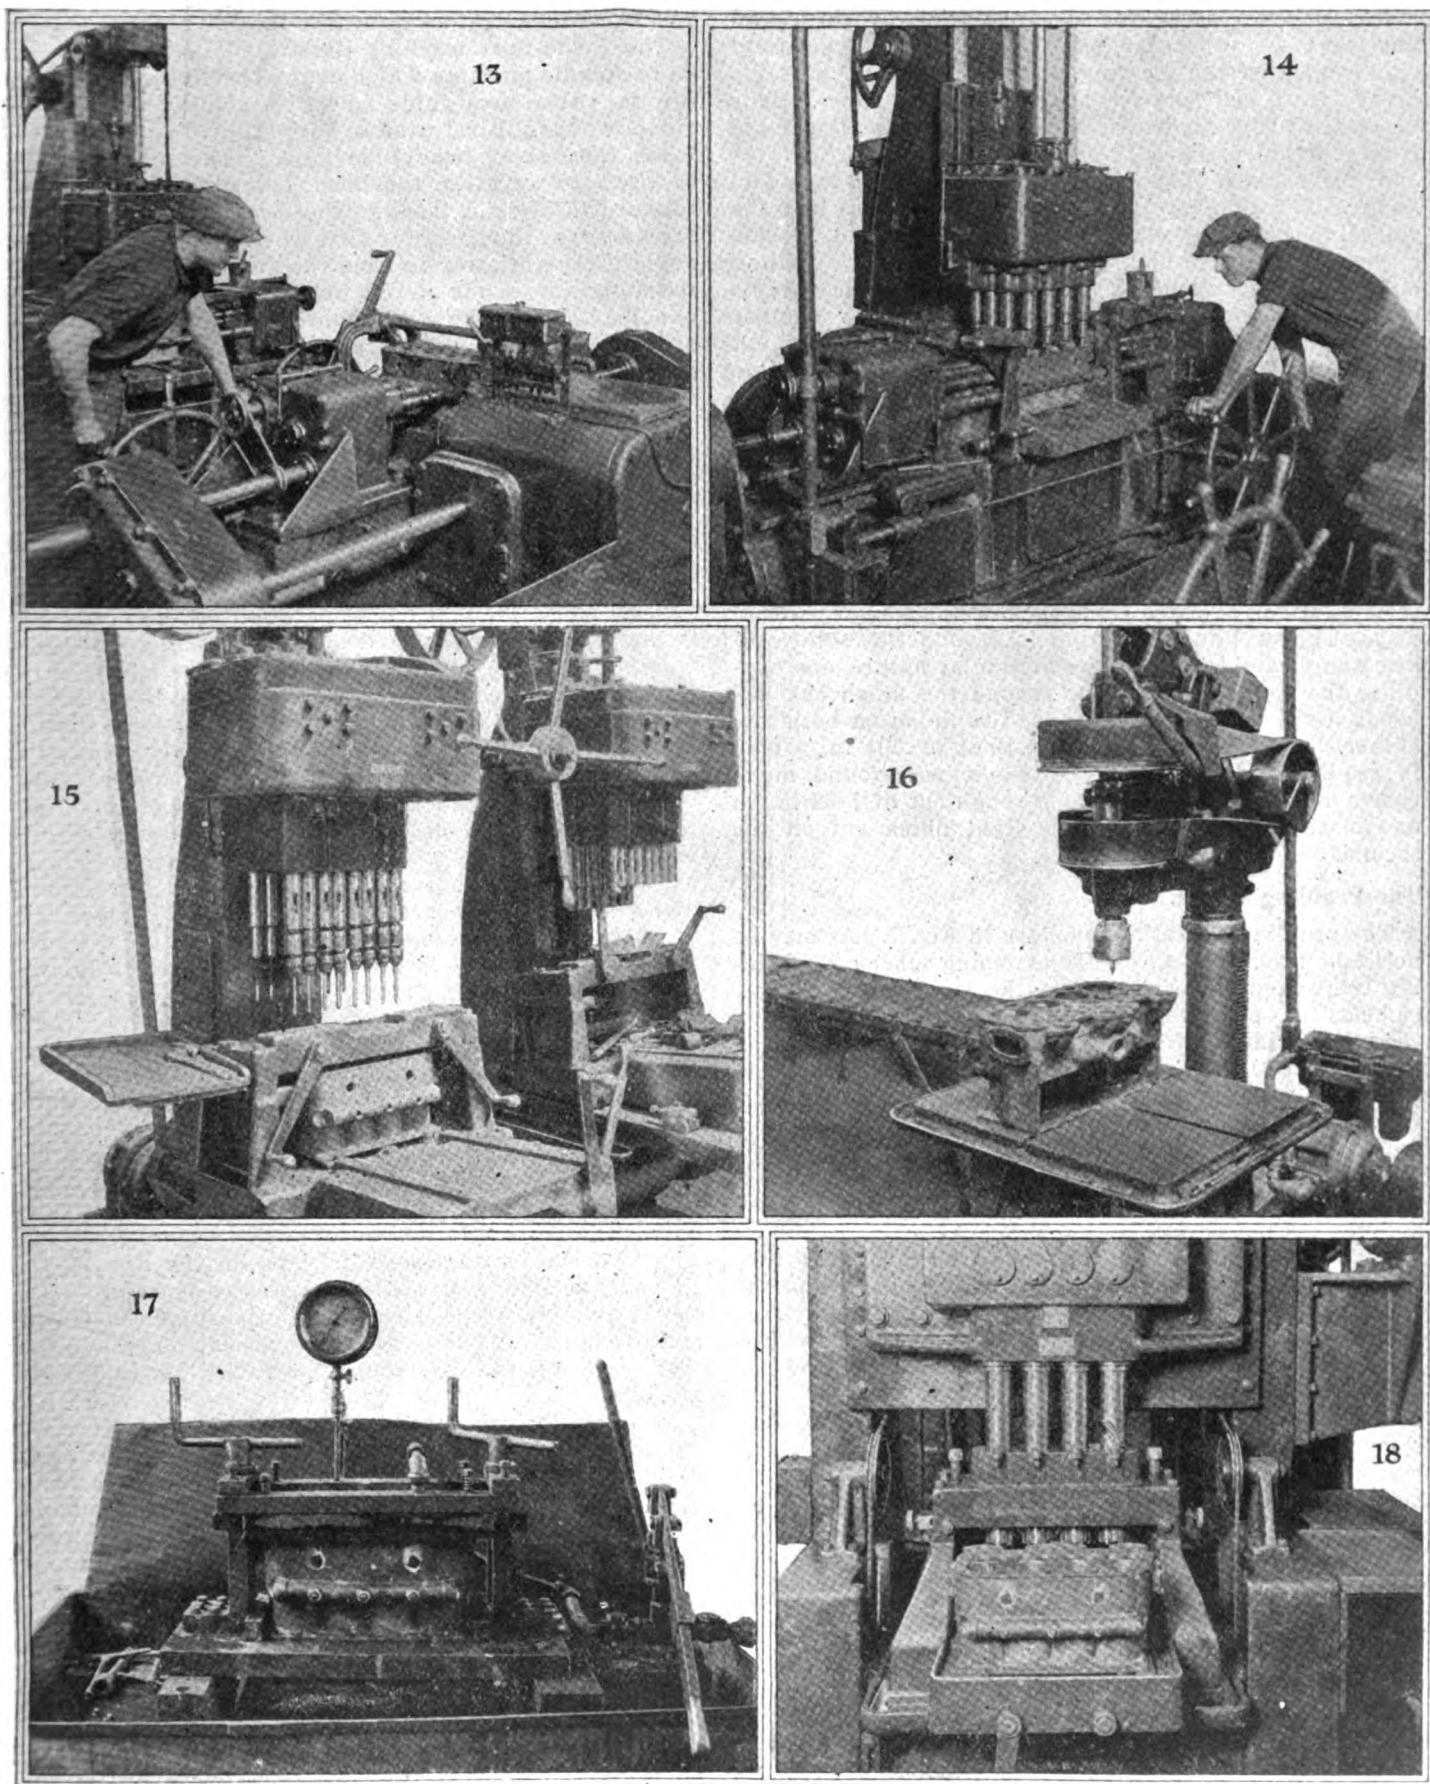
Two-way Foote-Burt taper which taps three water circulating plug holes on the rear side of the block, the gas intake manifold flange cap screw hole and two valve inspection cover stud holes simultaneously. Fig. 14—Three-way Foote-Burt taper which taps 35 holes simultaneously in the Olds cylinder blocks. Fig. 15—Foote-Burt machine for semi-finish reaming the valve stem guide holes. Fig. 16—Garvin taper which finish taps all the bolt holes for the cylinder head and exhaust manifold studs. Fig. 17—Fixture used for water testing the cylinder blocks. The water test is given at 60 lb. hydraulic pressure. Fig. 18—Foote-Burt machine for giving the cylinder blocks a semi-finish ream. One man runs three of these machines, which reams four cylinders bores at a time and takes off .064 in. of metal, leaving .020 in. for finish
